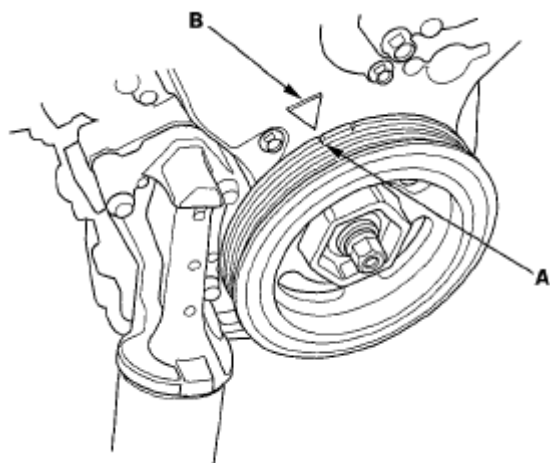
Identifying Timing Mark On Crankshaft Pulley
